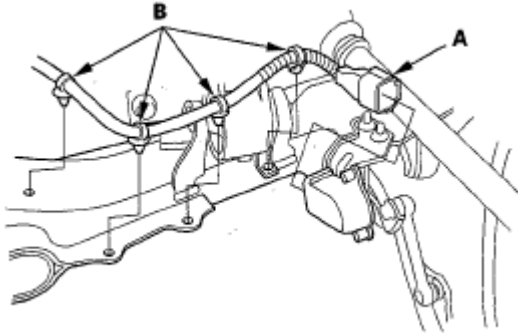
Identifying Headlight Adjuster Leveling Sensor Connector And Harness Clamps
